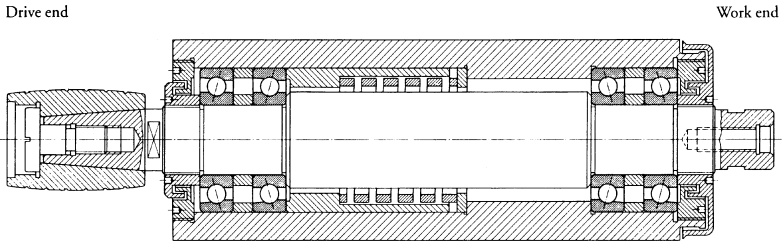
Bore-grinding spindle. (From FAG, 1998, with permission of FAG OEM and Handel AG).
